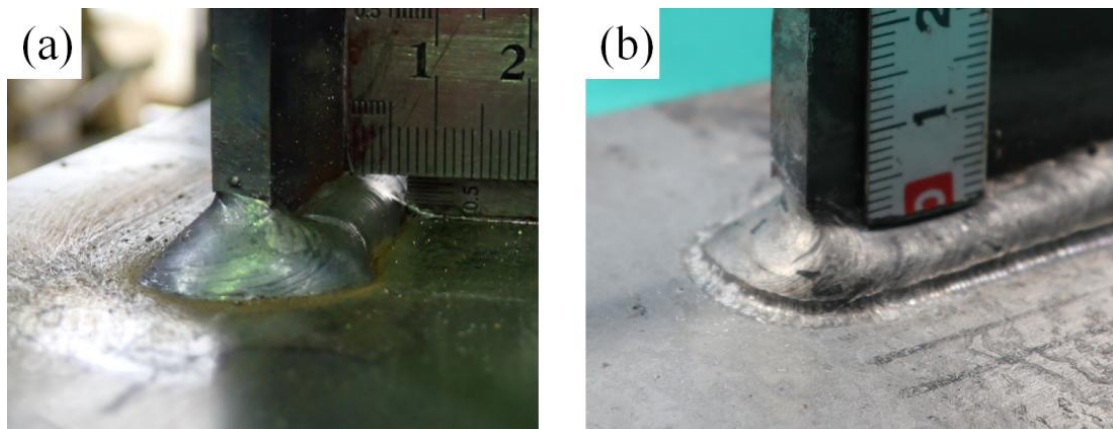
Appearance of weld toe. (a) As-welded toe, and (b) HFMI-treated toe.
